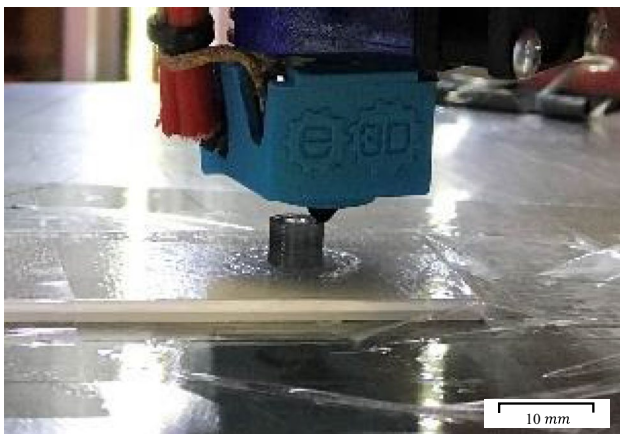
Hollow profile staking post printed using Tractus3D T850 3D printer
